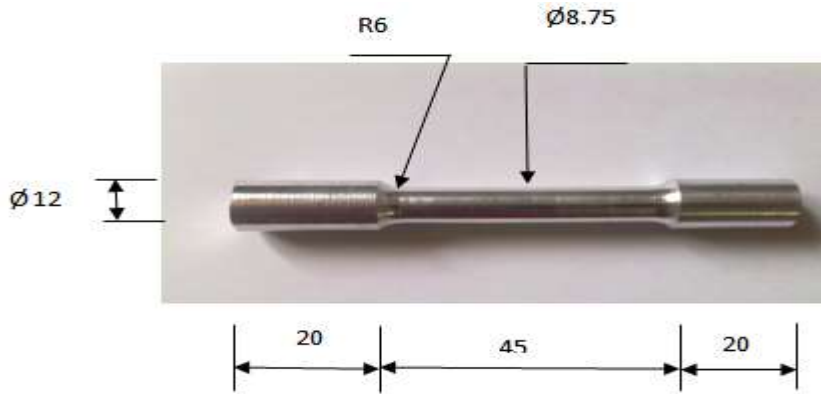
; Geometry of tensile test specimen; all dimensions in millimeter according to (ASTM A370) standard specification.
